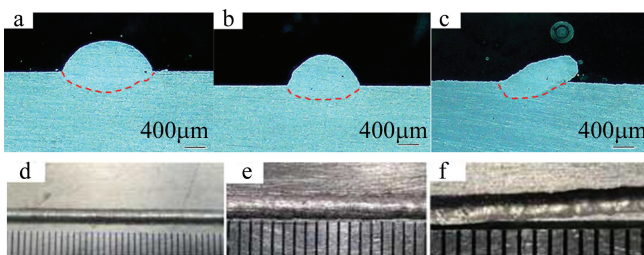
Weld cross section and surface topography in different distance between laser beam and wire conducted by double beam laser in serial mode
